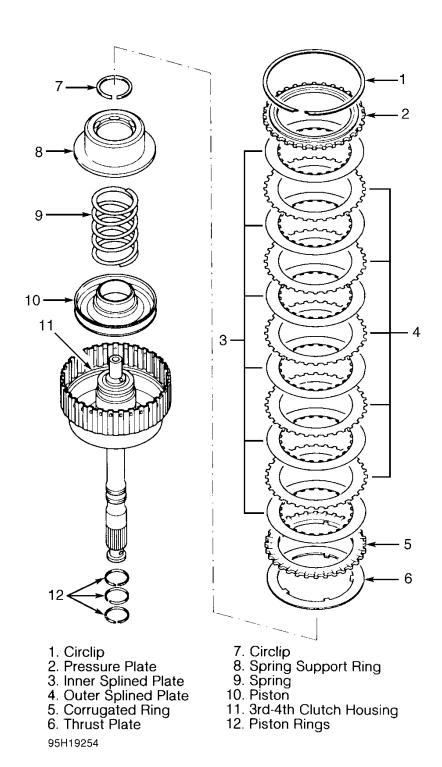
Exploded View Of 3rd-4th Apply Clutch (Late 1993 & 1994) Courtesy of VOLKSWAGEN UNITED STATES, INC.
